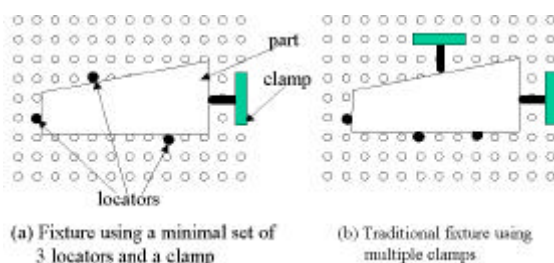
Examples - 4 point contact minimal fixture and a traditional fixture.
